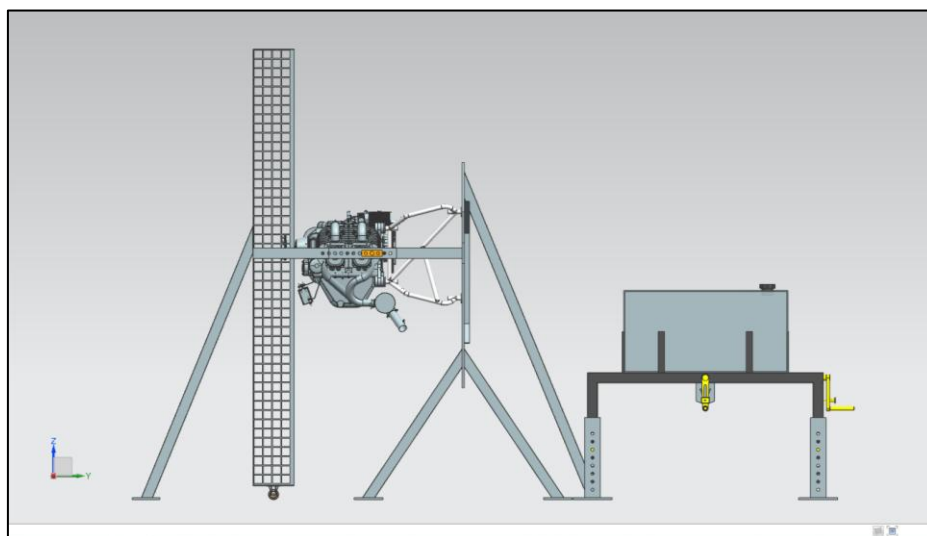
Side View of the Test Rig Setup CAD Modelled in UGNX 12.0
